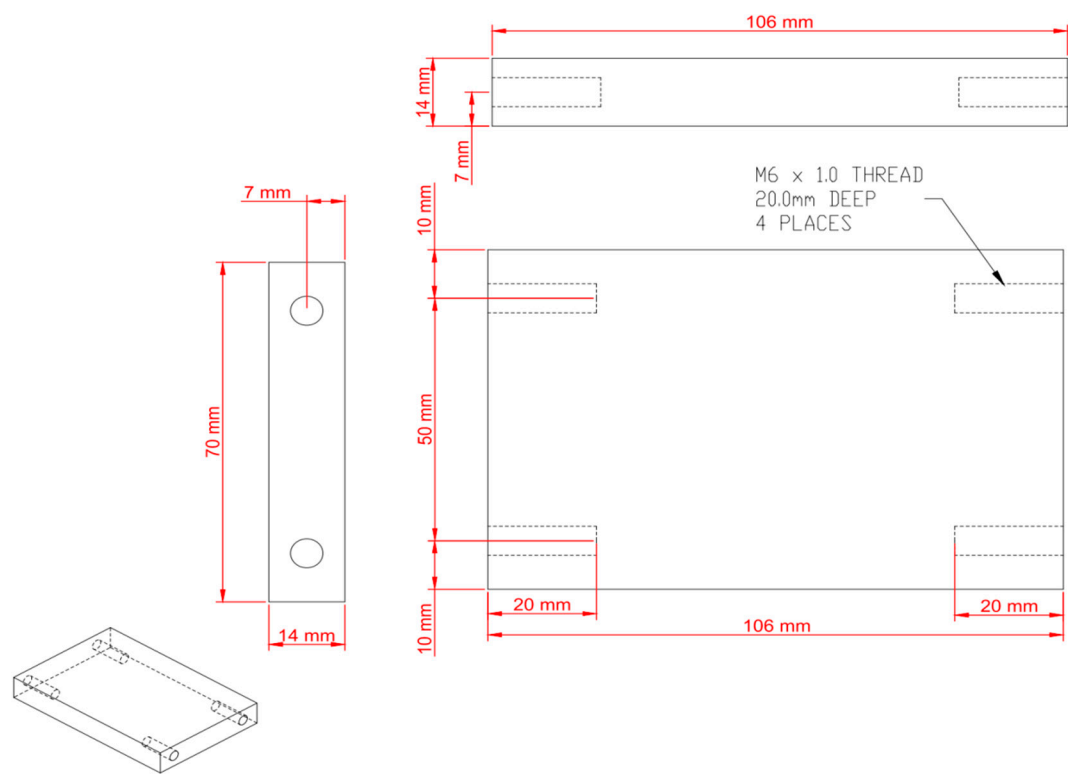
Detailed mechanical drawing of Part 9 from Figure S1.
